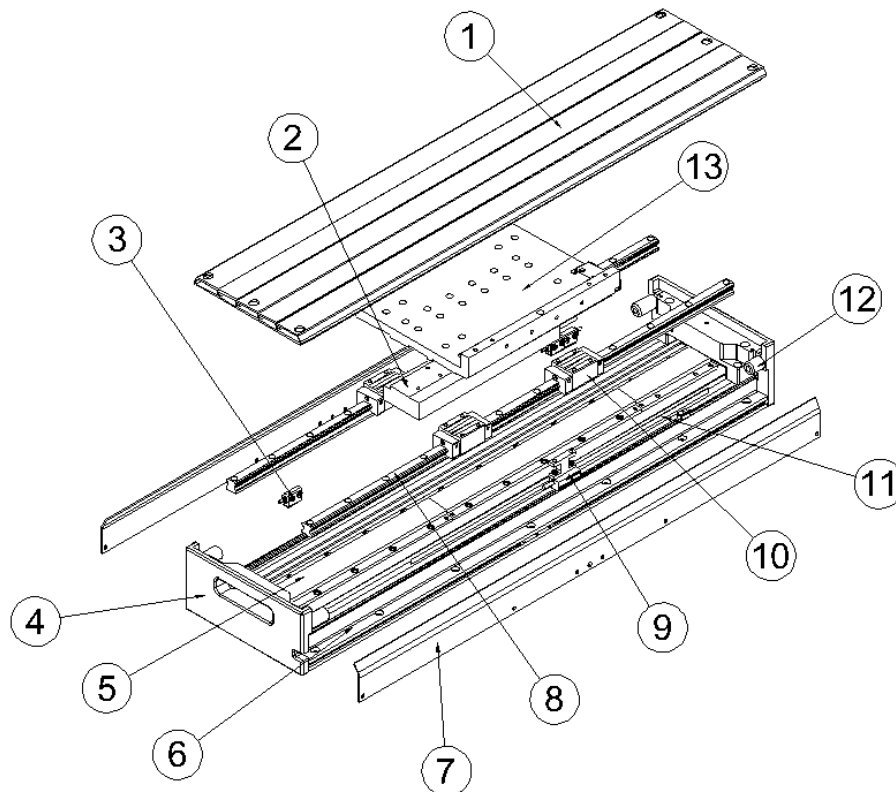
Main components of the linear motor system – here for a LMSSA linear motor system
